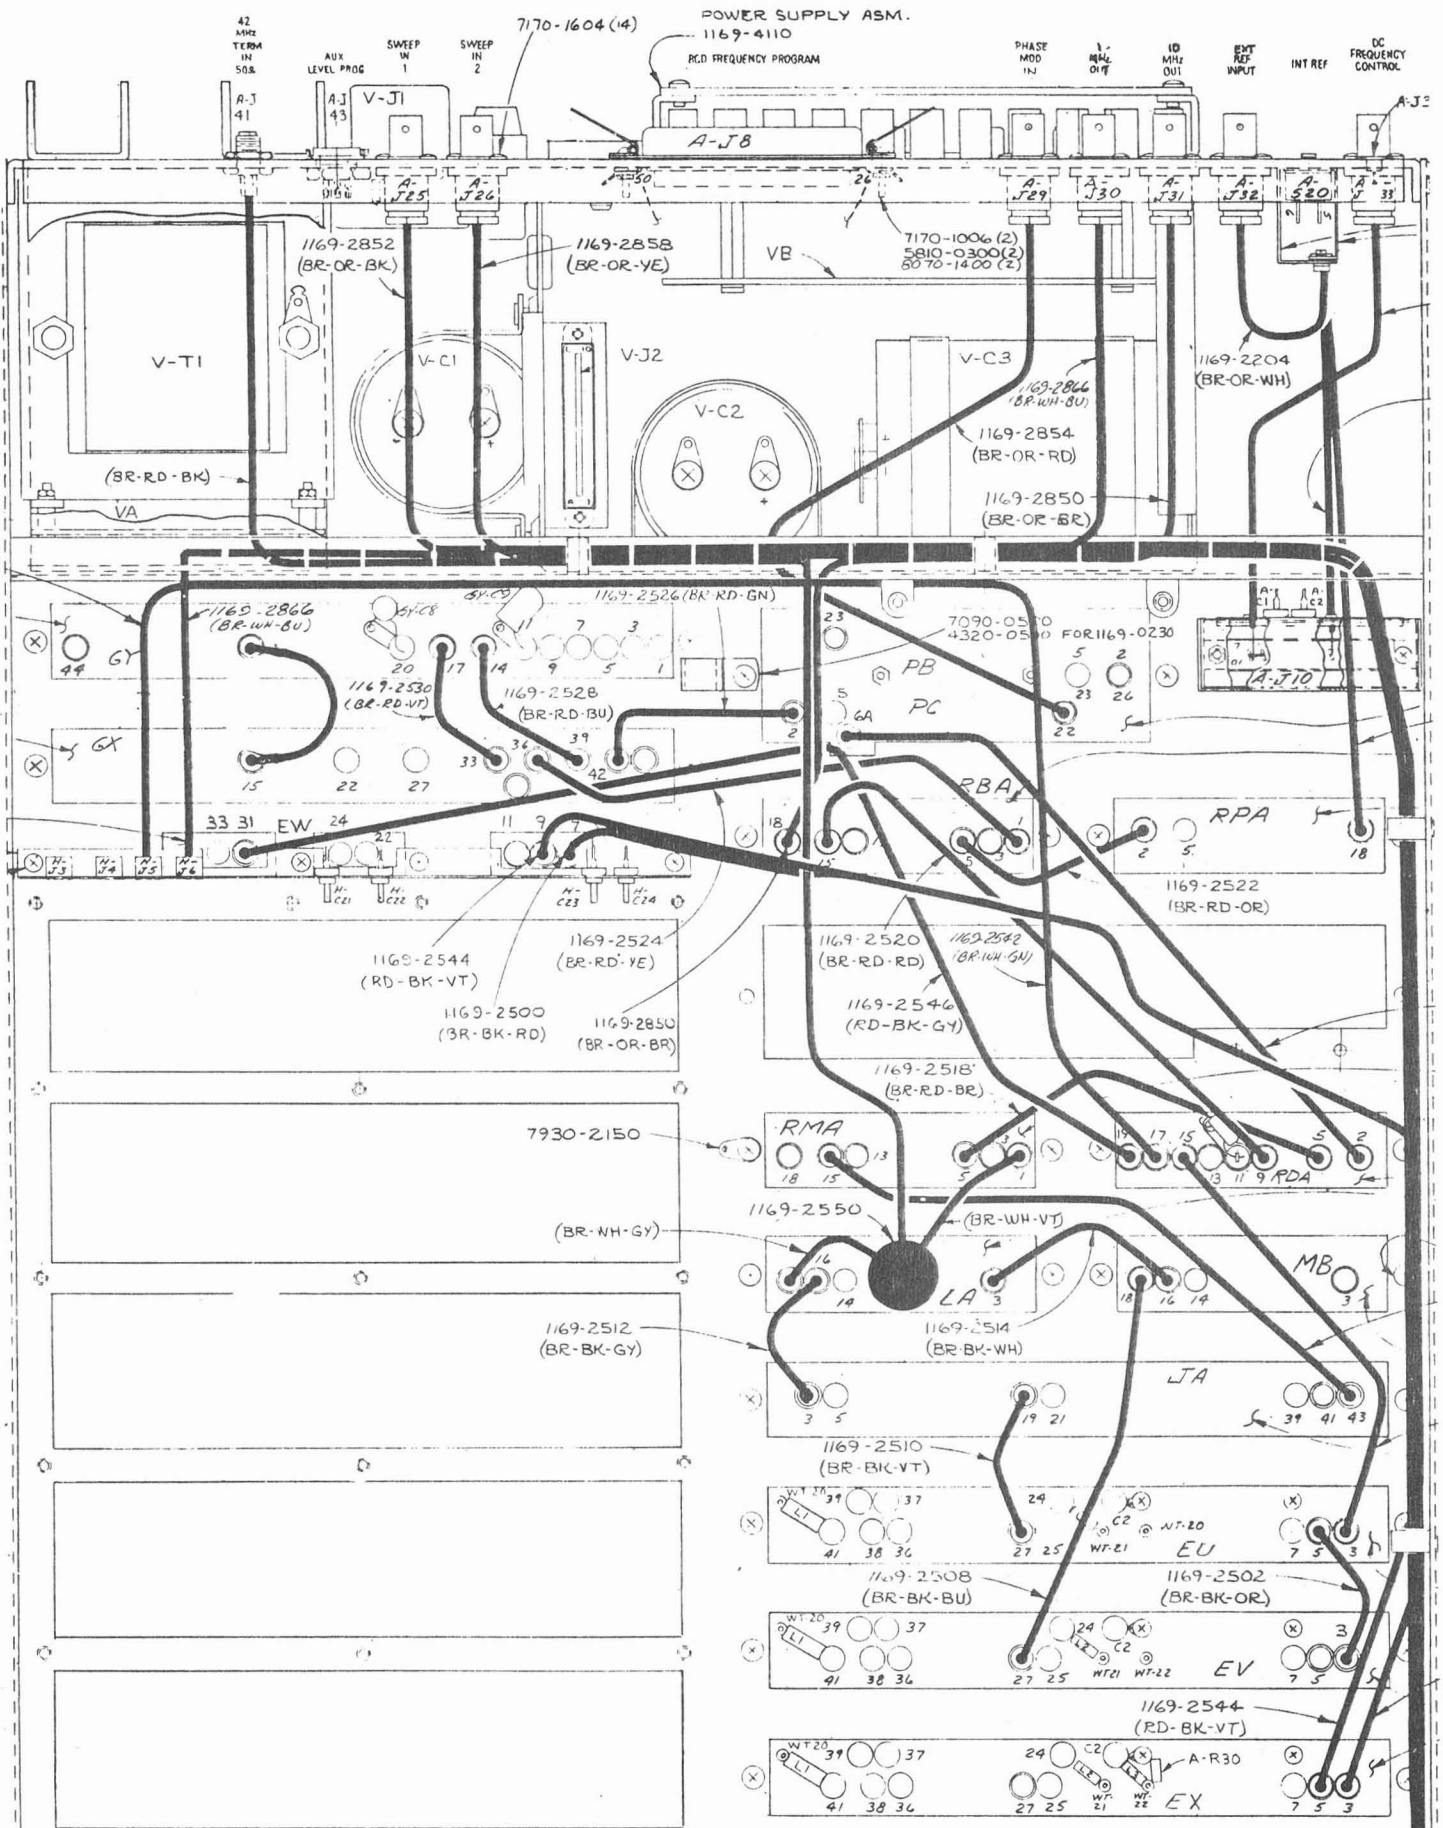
Rigid r-f coaxial cabling detail, bottom view of chassis, with microwave and UHF Sections removed. See also Figure 5-7.
